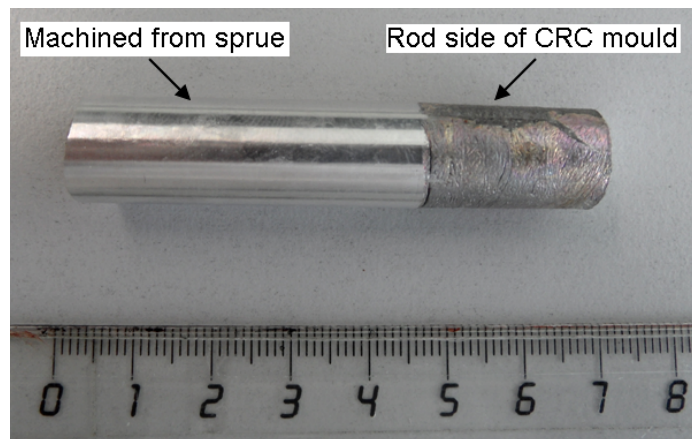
Photograph showing the machined sample used for X-ray tomography study.
